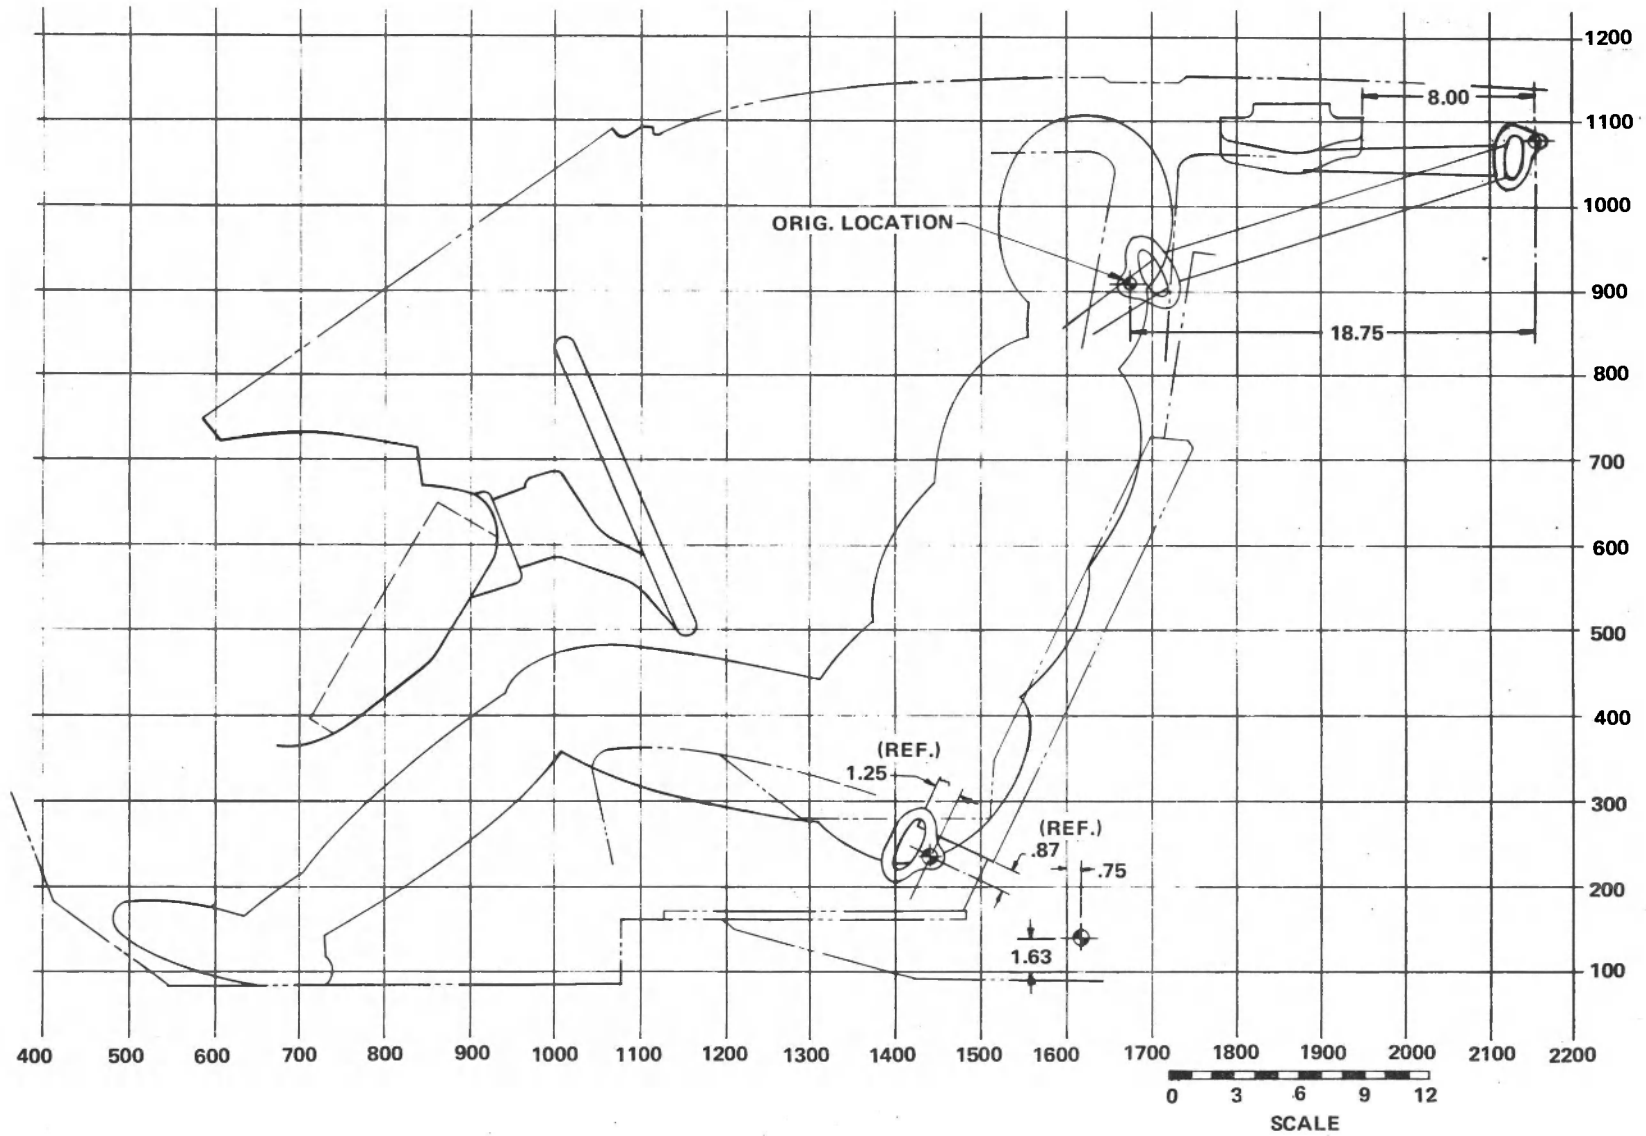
RSV AIR BELT ANCHOR POINT GEOMETRY
